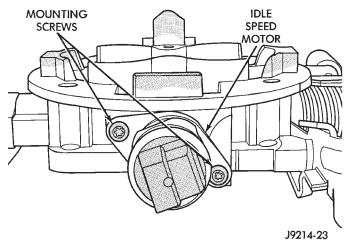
Mounting Bolts (Screws)—IAC Motor—5.2L Engine
